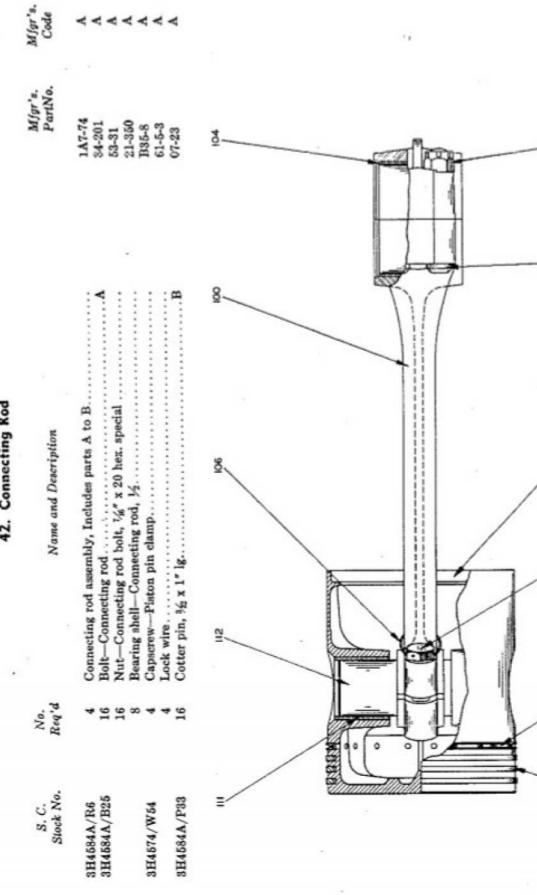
Cross Section through Connecting Rod and Piston Assembly
